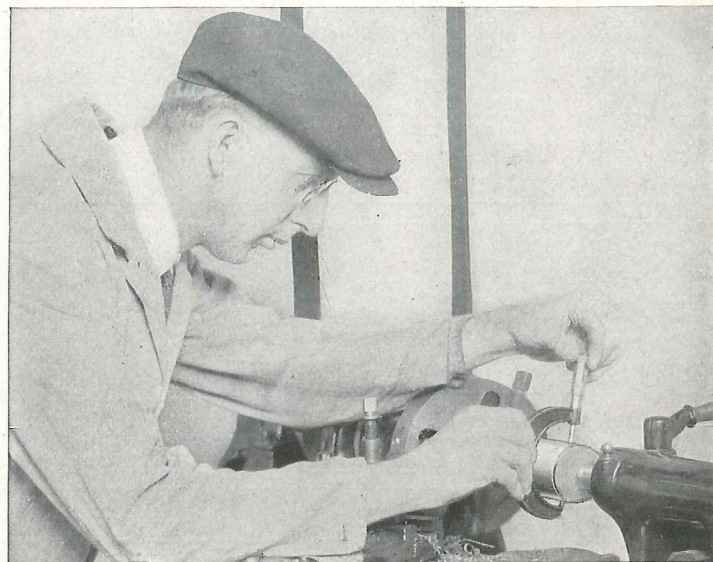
Using a Micrometer Caliper Measuring Work in the Lathe
